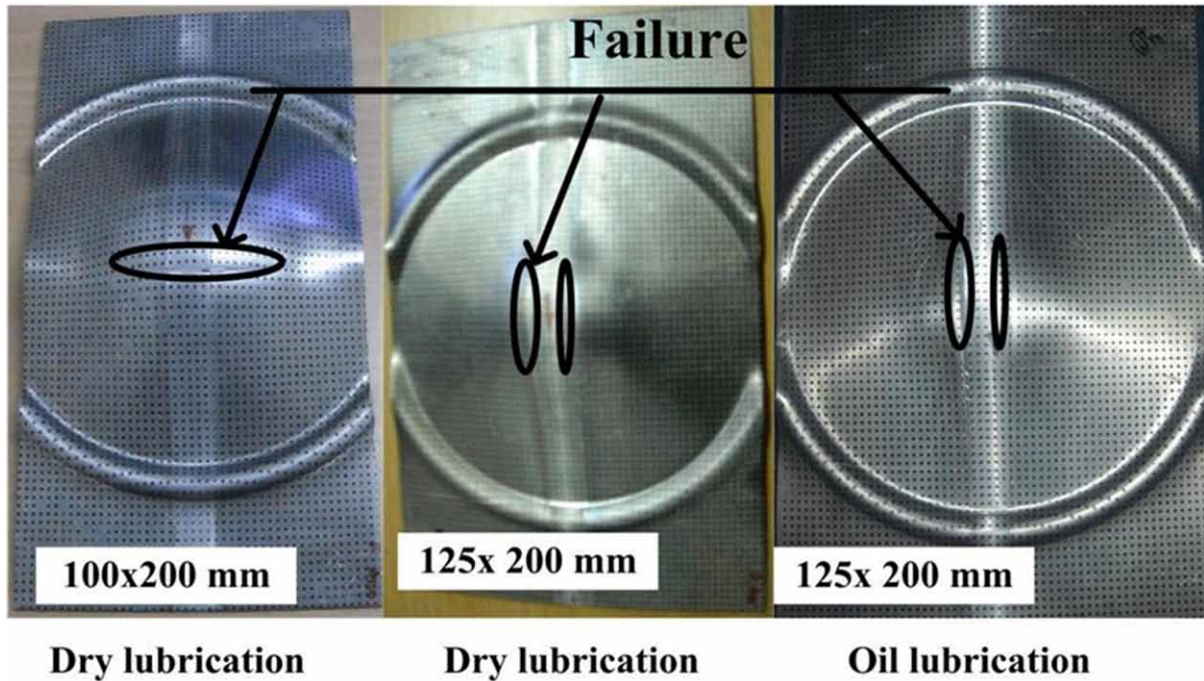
Failure pattern in FSW TWB with longitudinal weld orientation (Ramulu, 2013)
